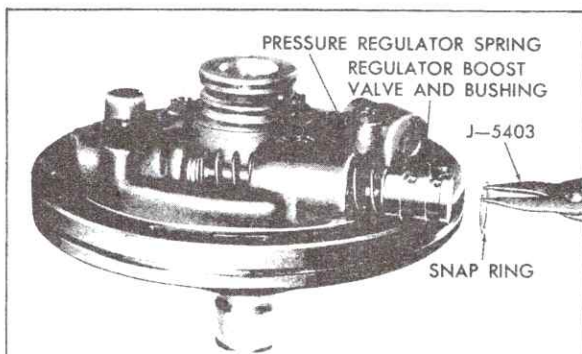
Removing Pressure Regulator Valve Snap Ring
